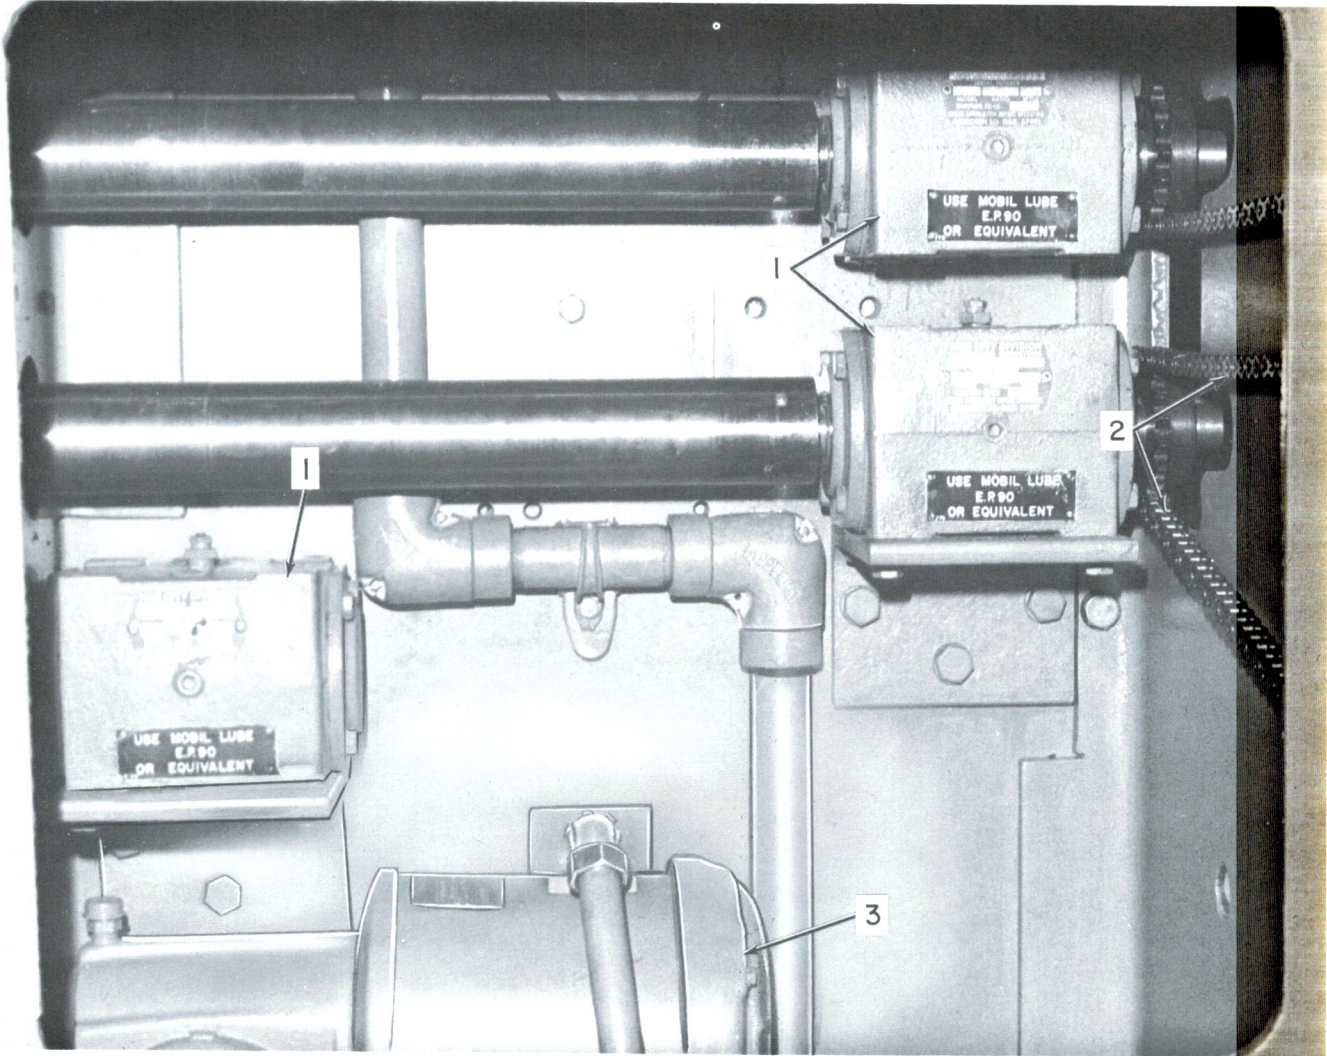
FOLDING SECTION LUBRICATION (VIEW 3)
